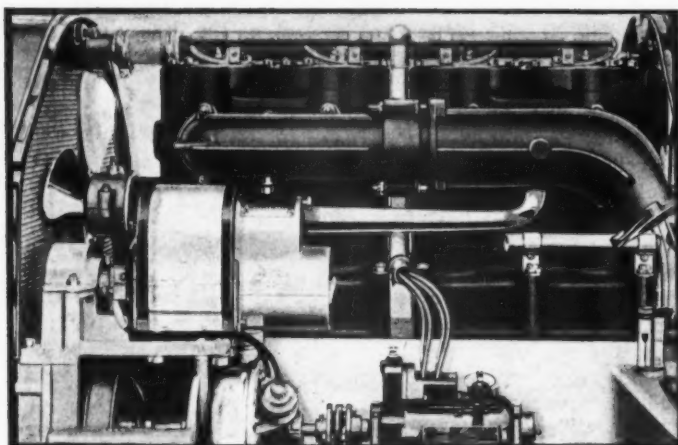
Left side of the motor, showing the arrangement of Mea magneto and Deaco lighting generator
